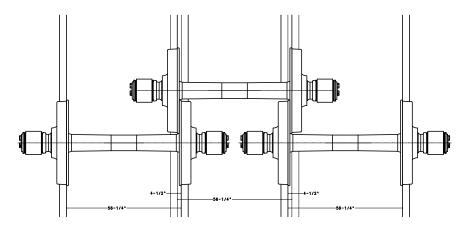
Recommended storage spacing dimensions for shipping passenger car wheel and axle assemblies with bearings applied.
